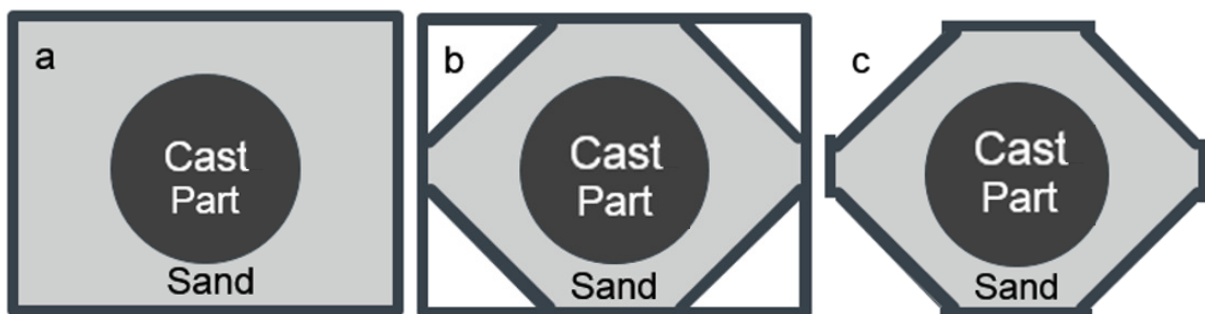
Sand saving concepts: a) standard moulding box, b) standard box with sand savings c) optimized moulding box.
